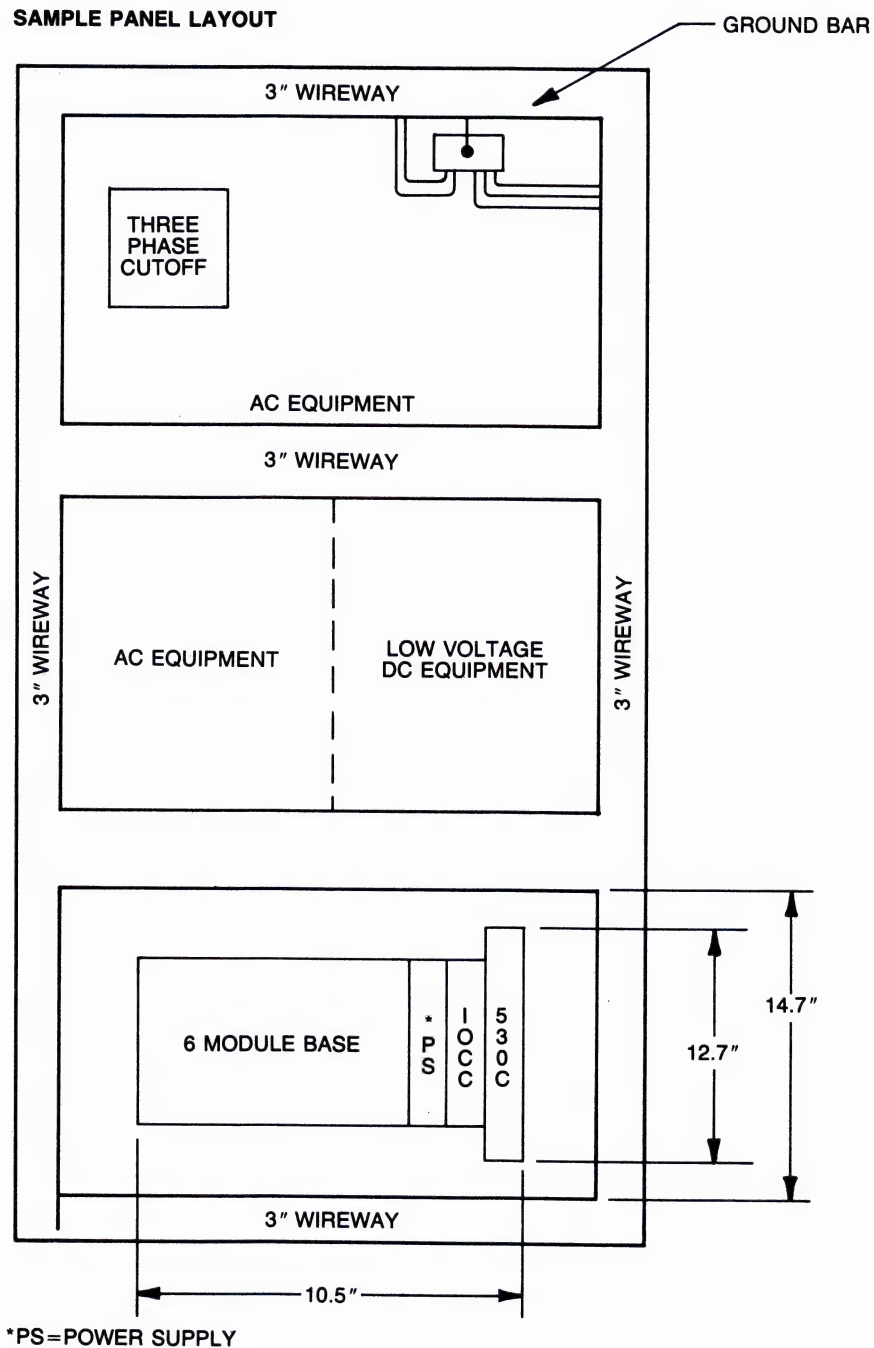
Wireway Layout for Model 500-5892 Base Assembly
